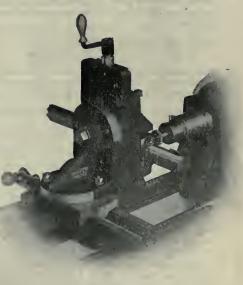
MILLING A KEYWAY (WOODRUFF SYSTEM).
